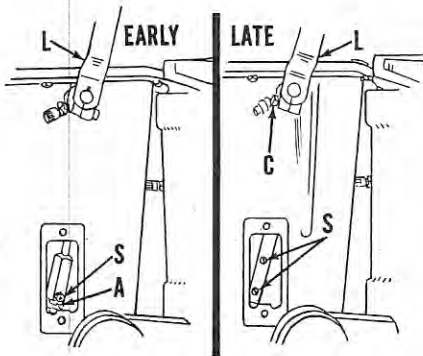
Upper motor leg with shift linkage access plate removed. Models before Serial Number 1,400,000 are shown on left.
